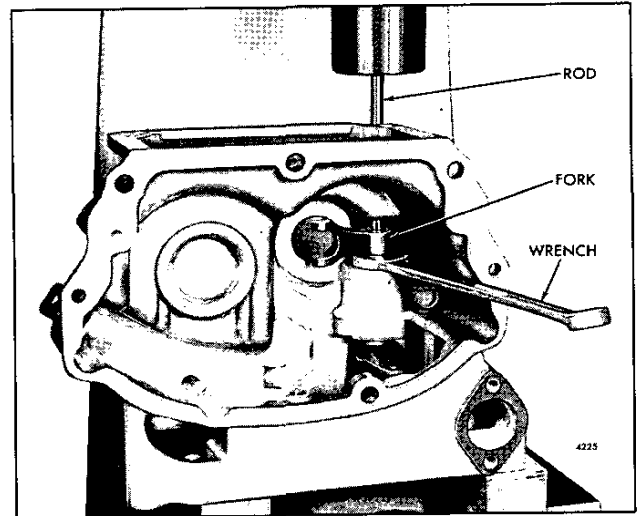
Removing Governor Operating Fork from Operating Shaft and Bearing Assembly
